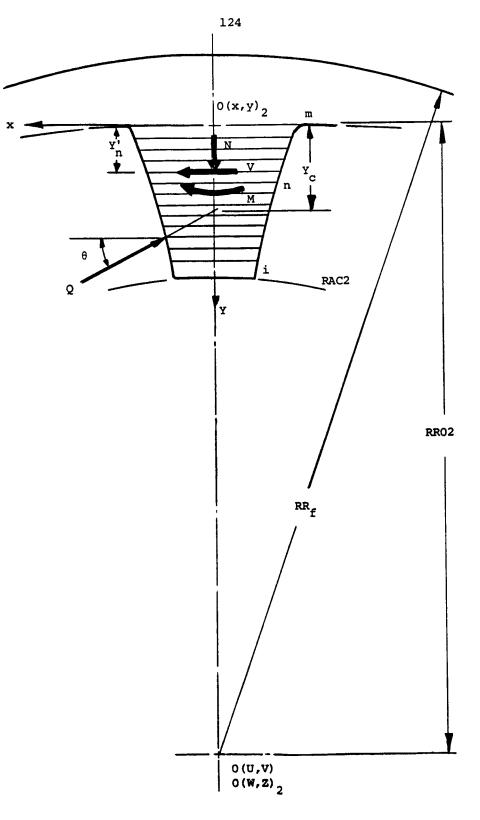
Internal Gear Tooth Bending, Shear and Normal Deflection Model
